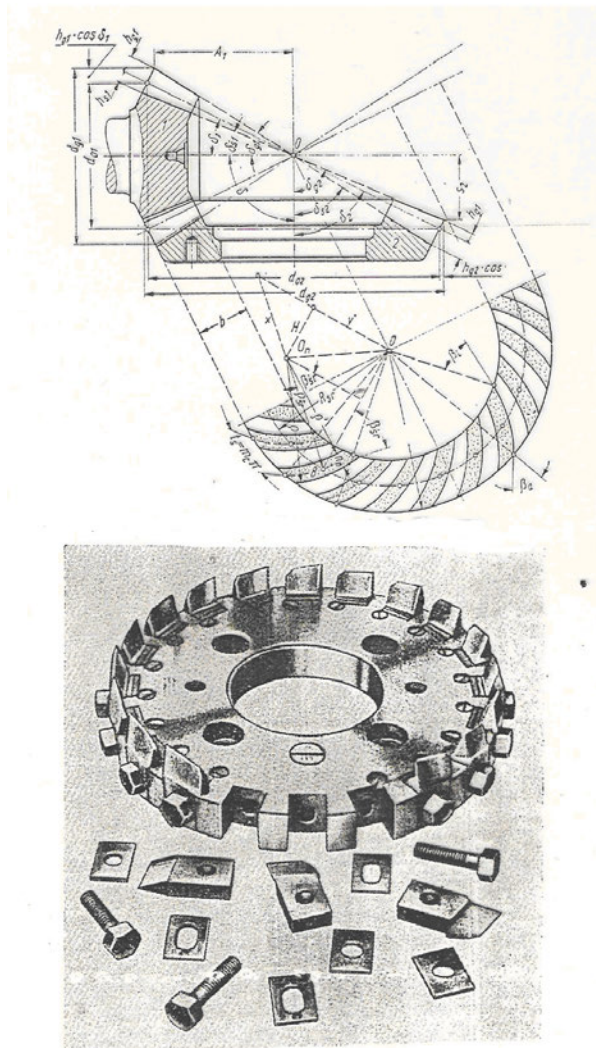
The Gleason process, a blade milling cutter [2]
